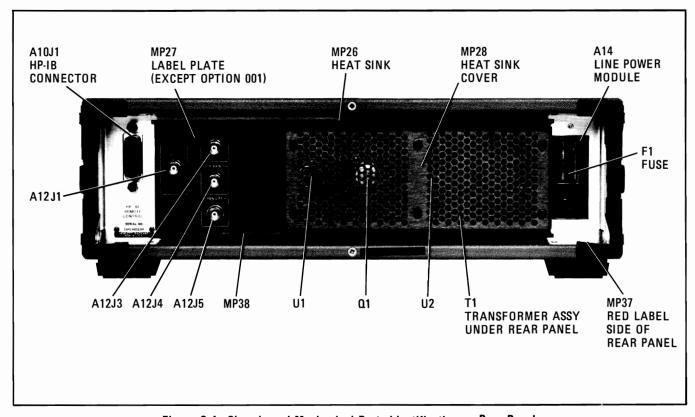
Chassis and Mechanical Parts Identification — Rear Panel
